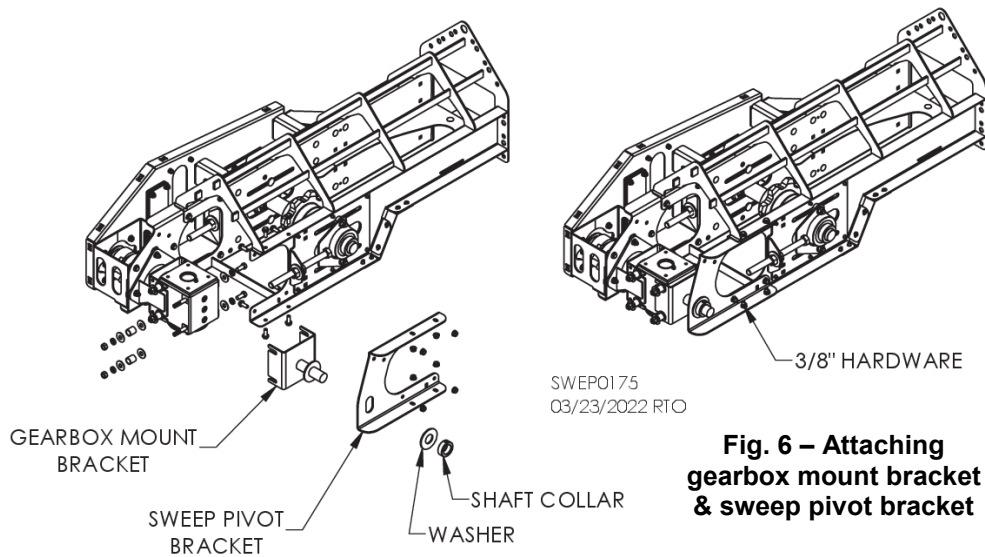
Attaching gearbox mount bracket & sweep pivot bracket
